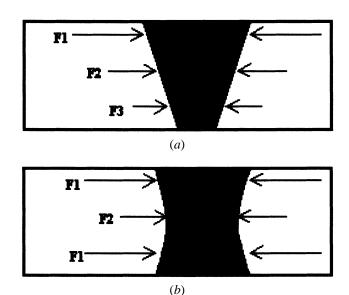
Sketch map of the shrinkage force in the welds: (a) VPPAW, bead-on-plate; and (b) DSGTAW, butt, no filler.
